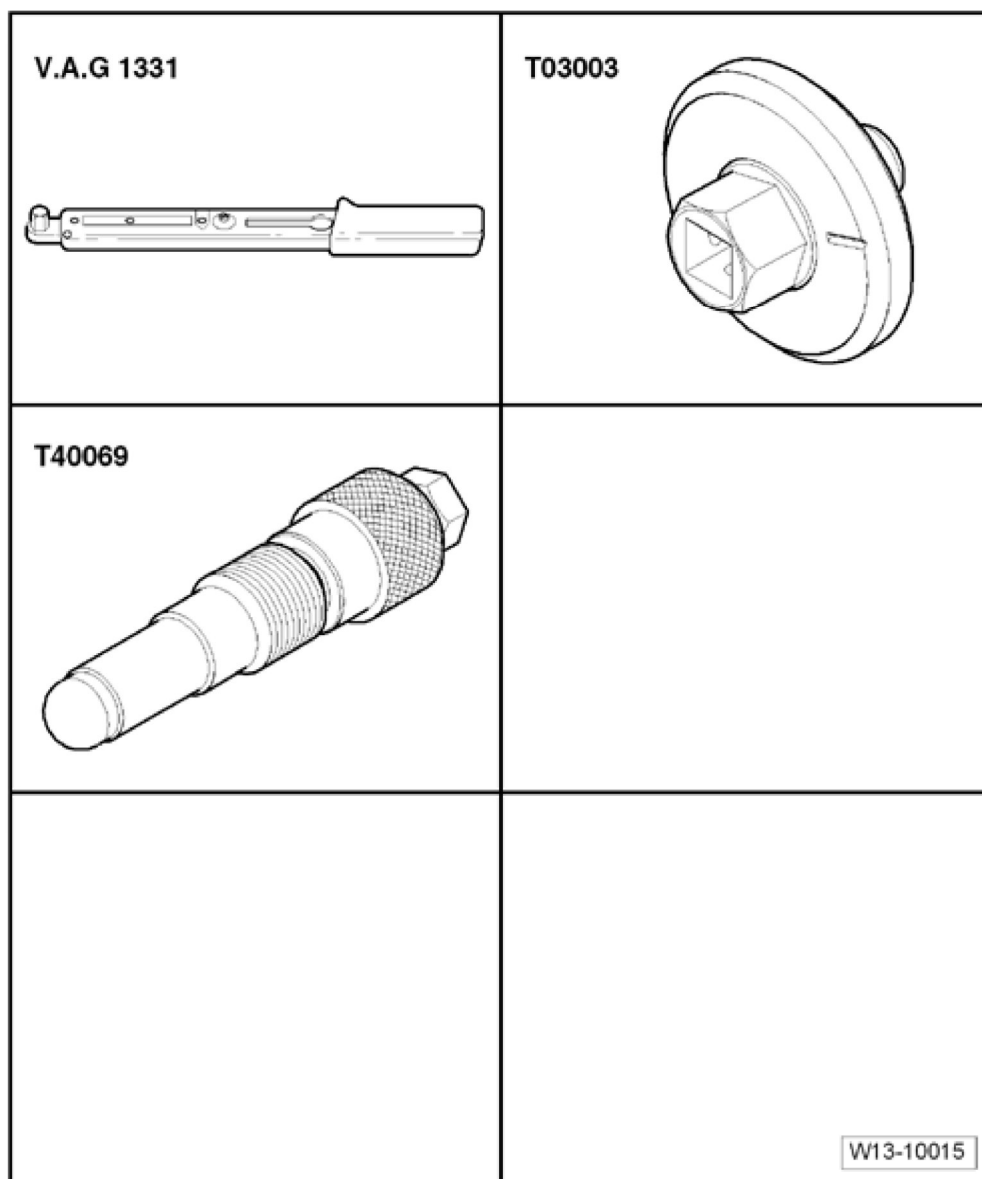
Identifying Special Tools -- Crankshaft, Securing
